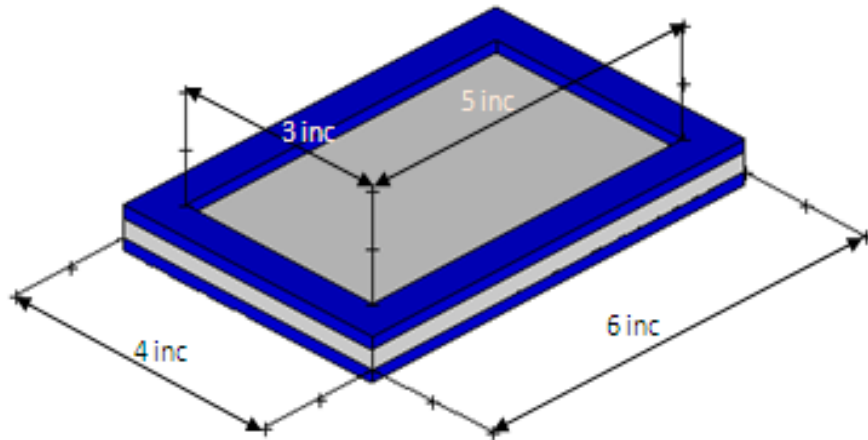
Geometrical specifications of steel fixture and the ABS impact test specimen
